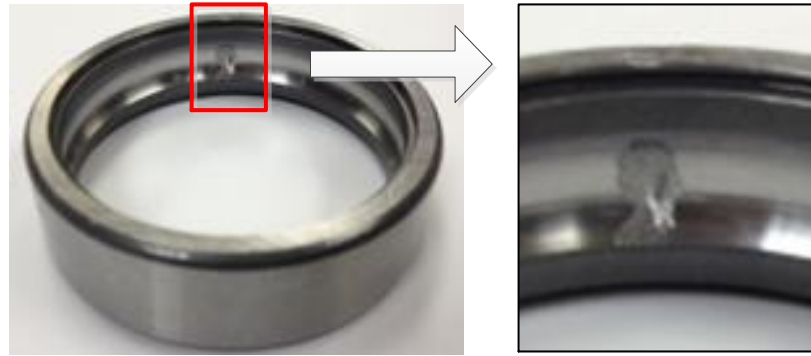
Photographs of the test bearing with a small seeded outer race defect
